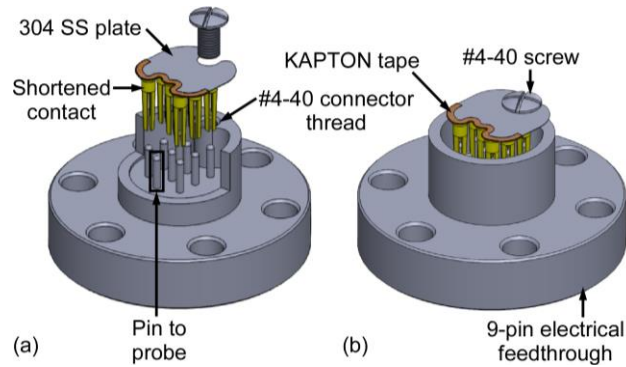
Grounding fixture on 9-pin electrical feedthrough that routes to the probe. (a) Explosive view with partially cropped feedthrough flange. (b) Grounding fixture assembled to the feedthrough.
